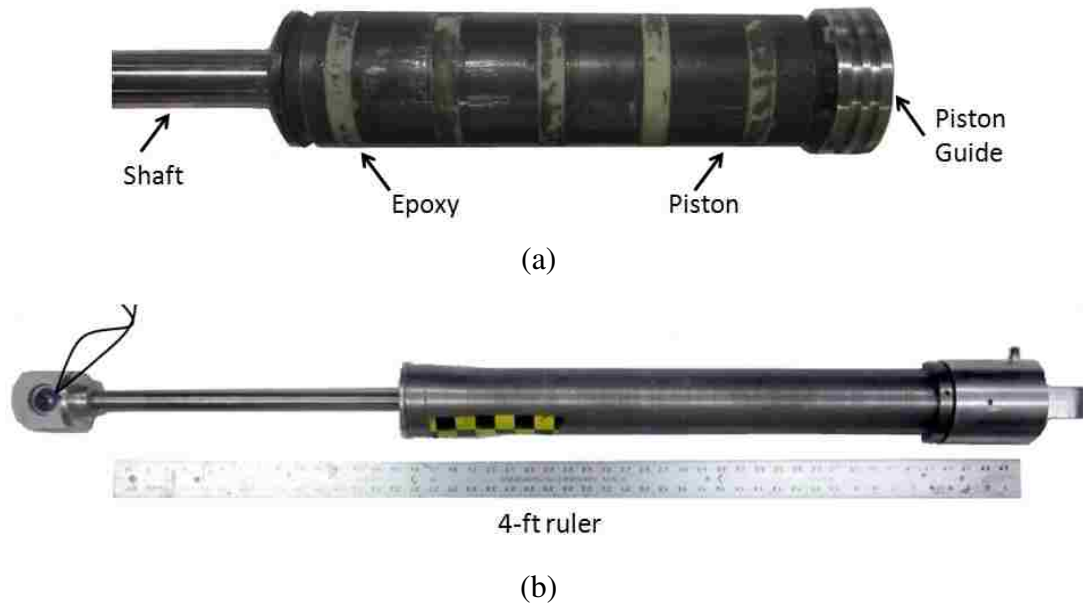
Fabricated (a) piston-shaft-guide assembly and (b) fully assembled MREA.
